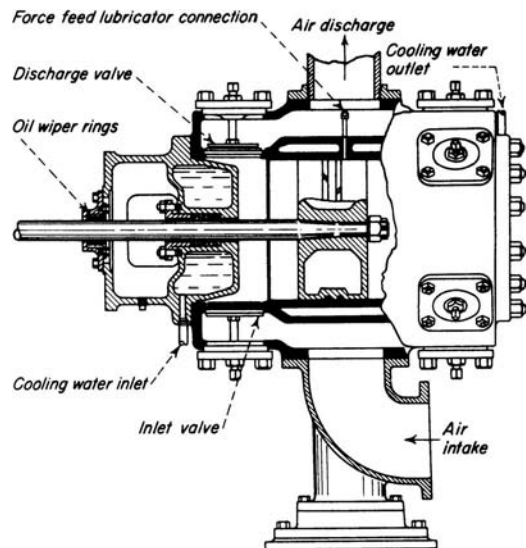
Typical double-acting compressor piston and cylinder.
